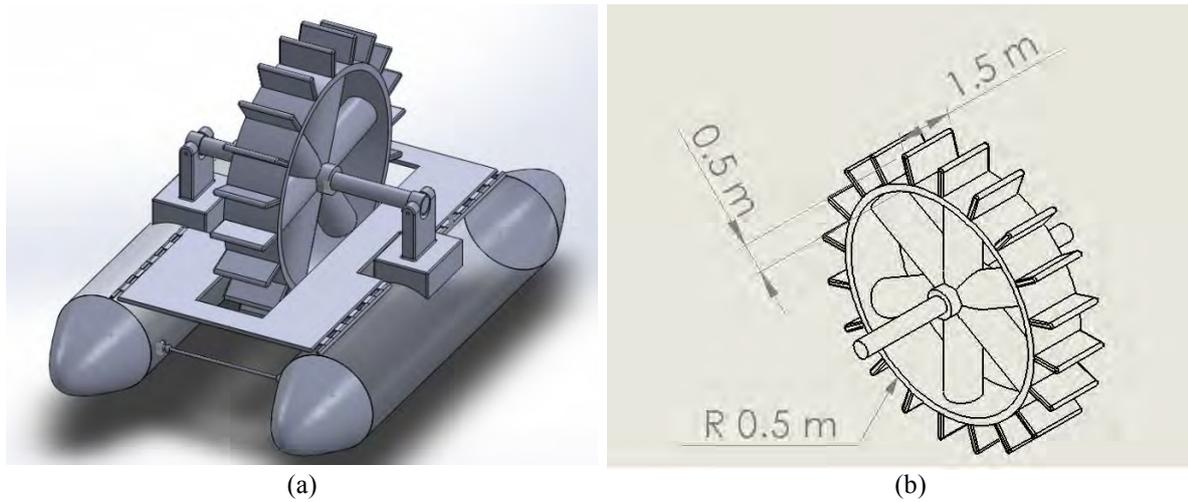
(a) Schematic drawing of floating the water wheel. (b) Schematic drawing of the water wheel dimensions.
